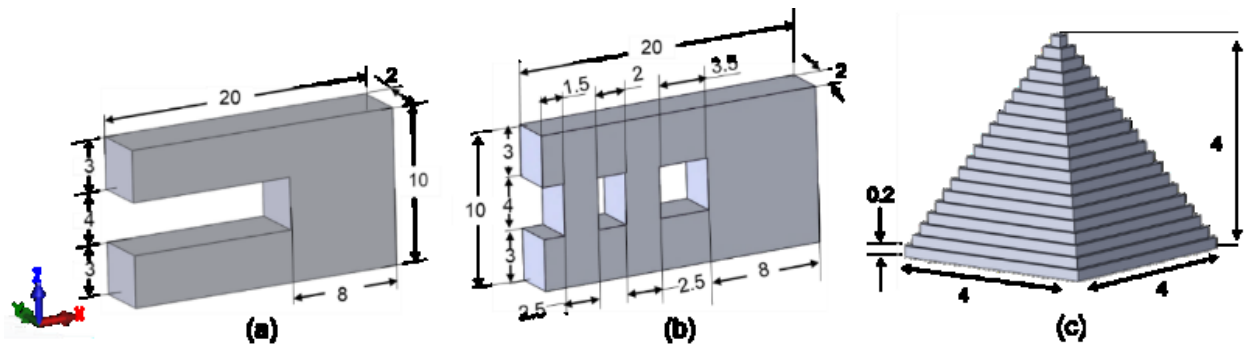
(a) C-shaped, (b) C-shaped with support and (c) pyramid dimensions in millimeter (mm).
